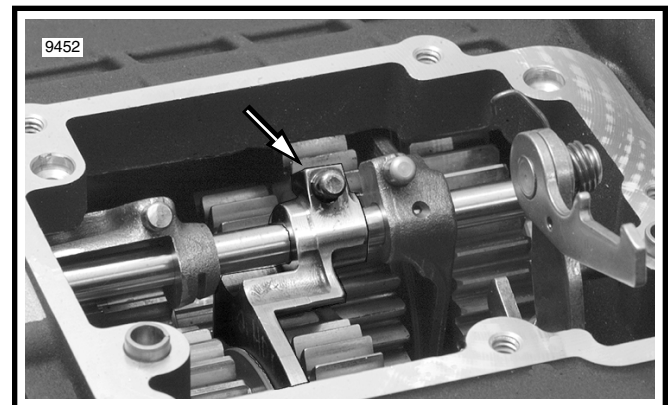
Install 1-2 Shifter Fork Onto Shift Ring
